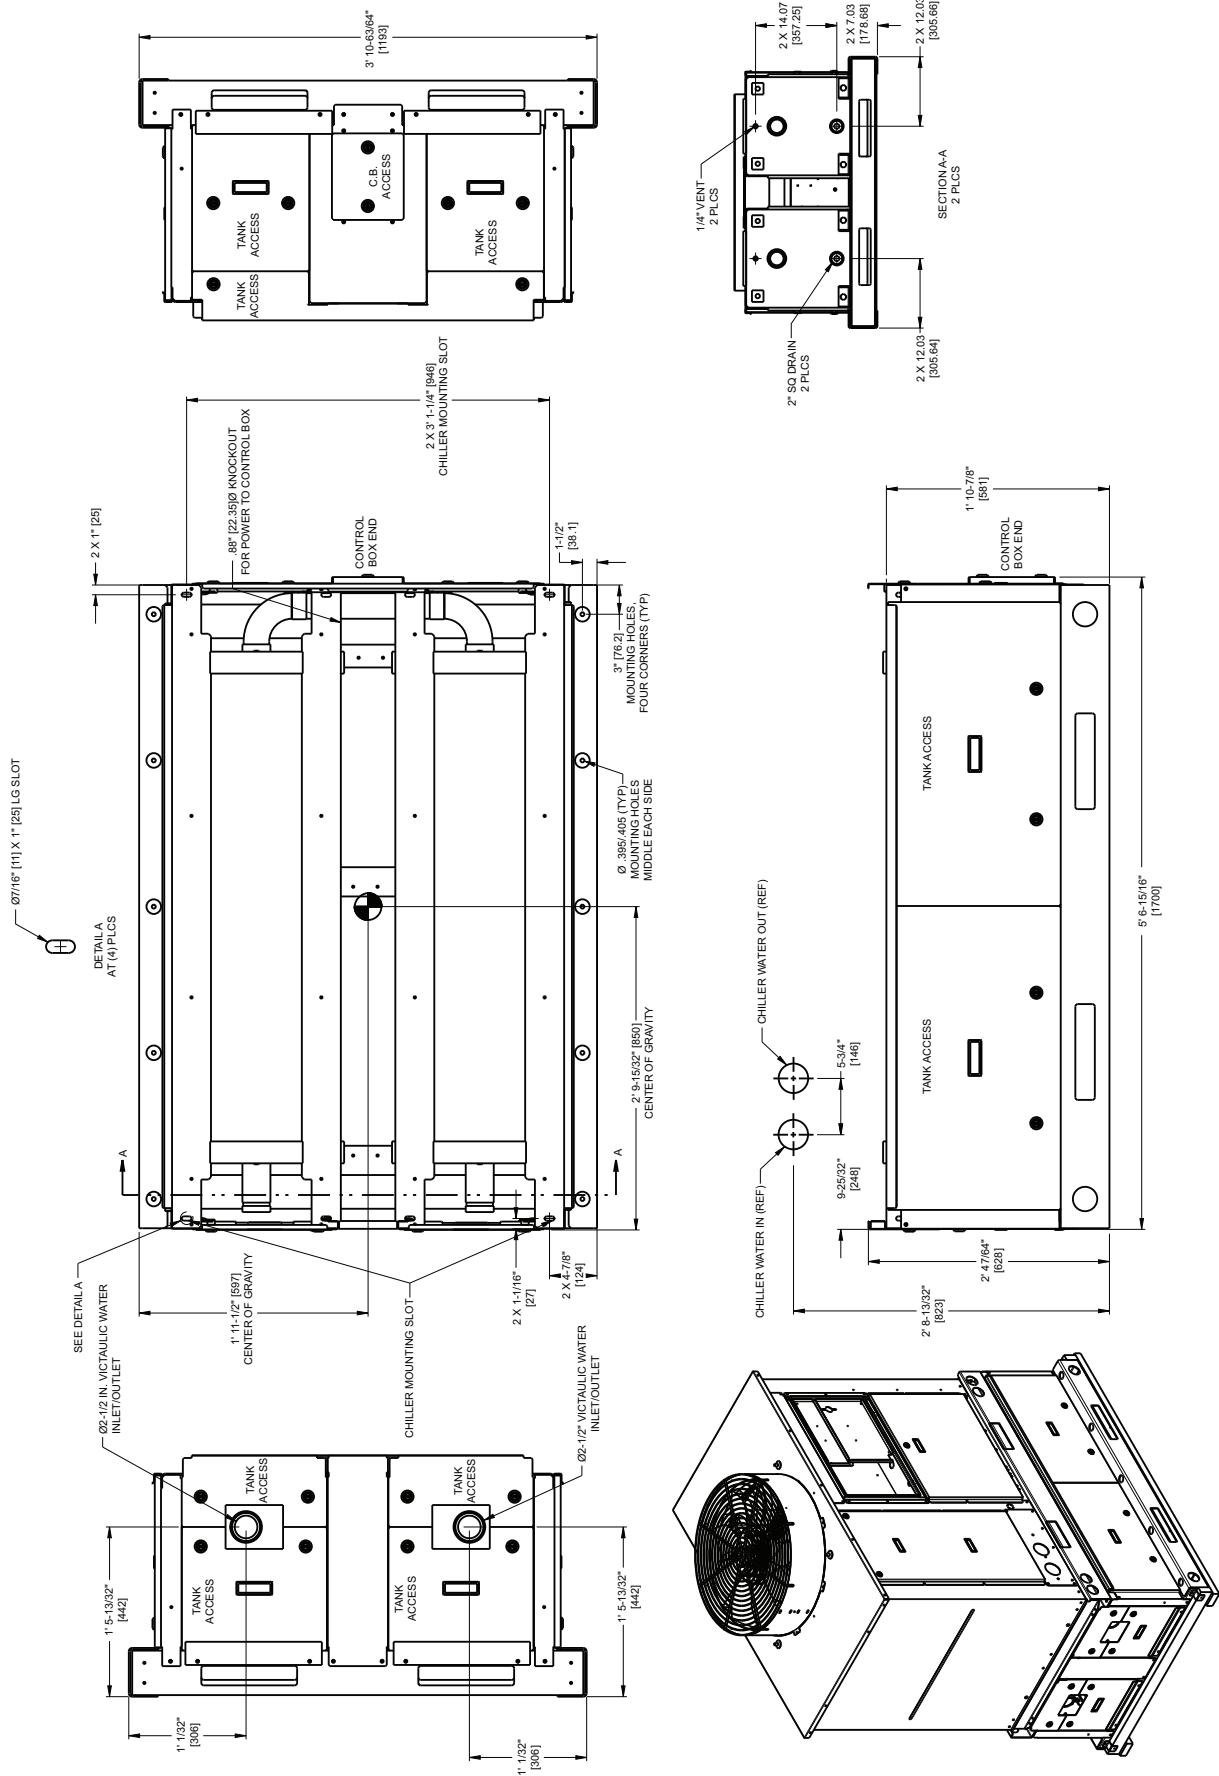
Accessory Storage Tank 30RA-900-050 Dimensions — 30RAP011,016 Units
